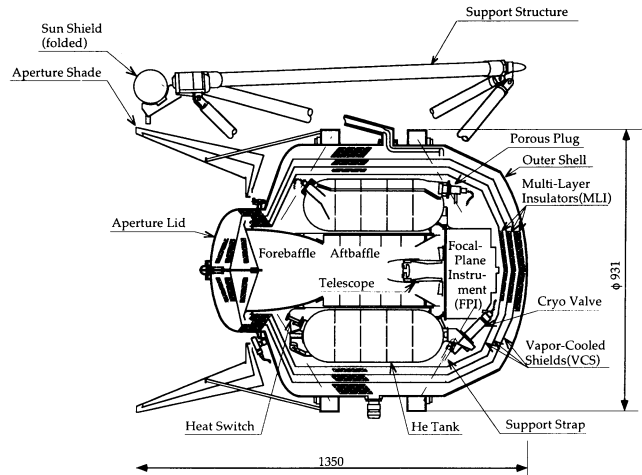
Cross-sectional view of the IRTS. Typical dimensions are indicated in millimeters.
